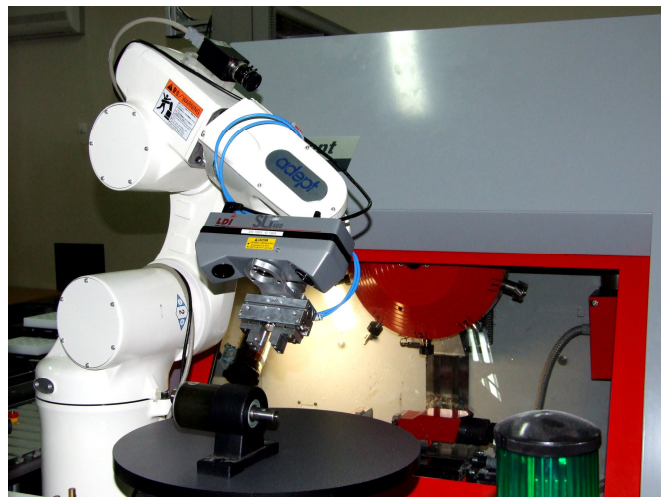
The 3D scanning probe mounted on the 6-DOF robot arm and a workpiece of interest placed on the rotary table.
